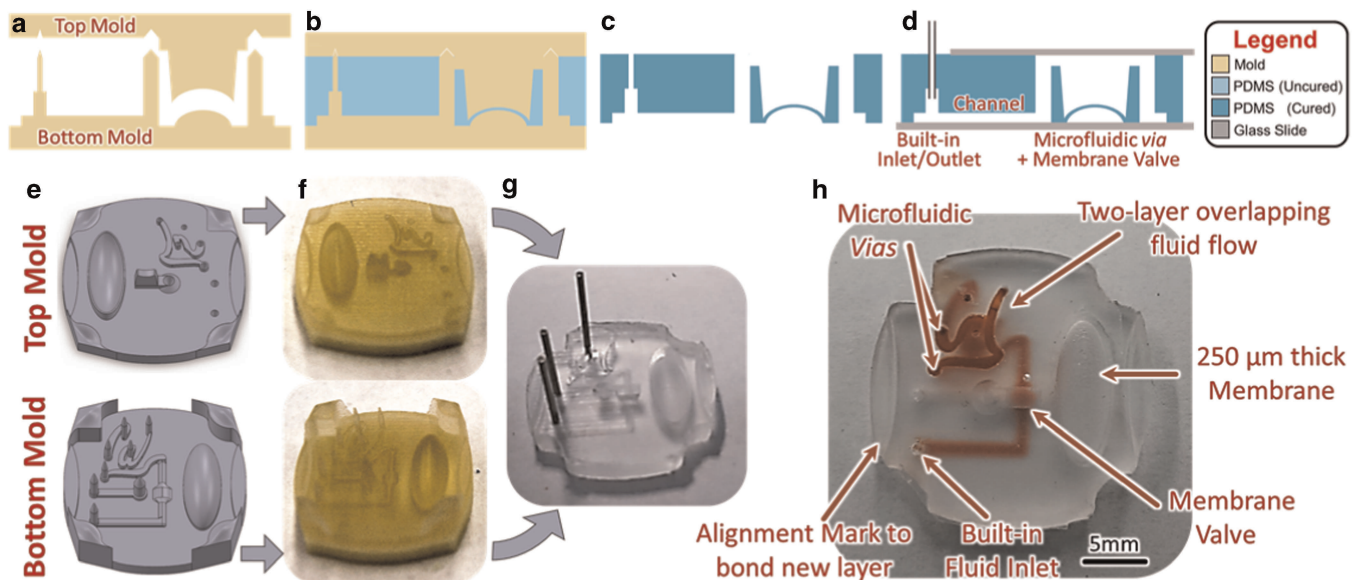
Illustration of the 3D printed transfer molding technique and process for two-sided microfluidic devices with detour vias and thin membranes. (a) Mold is 3D-printed from CAD model, treated, fitted together using alignment marks, and (b) filled with PDMS which is then cured. Excess PDMS is cut away using a scalpel, after which the mold is removed. (c) PDMS device has integrated inlets/outlets, membranes, and vias, and is (d) bonded to glass to create enclosed, arbitrary channels. The complex multi-level microfluidic device in (h) is fabricated using the CAD models shown in (e) and resulting 3D printed molds shown in (f). The devices are then demolded (g) and the channels are sealed (h) to allow enclosed fluid flow. The final device includes two layers of overlapping fluid flow, an elliptical membrane, a “Quake”-style membrane valve, multiple microfluidic vias, integrated fluid inlets, and alignment marks to create a stacked, multi-layer device.
